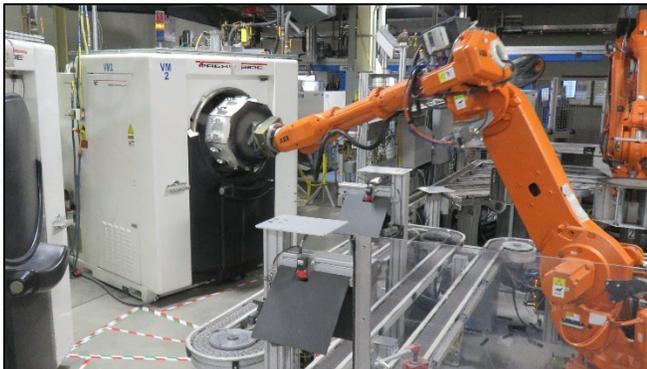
A robotic arm unloads a fixture loaded with plated plastic parts from a PVD machine.
